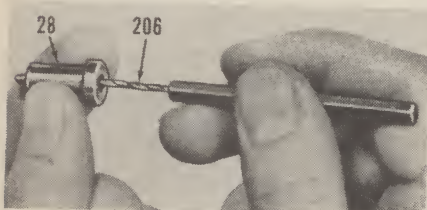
B—Reaming injector spray tip with GM tool J 1243.
